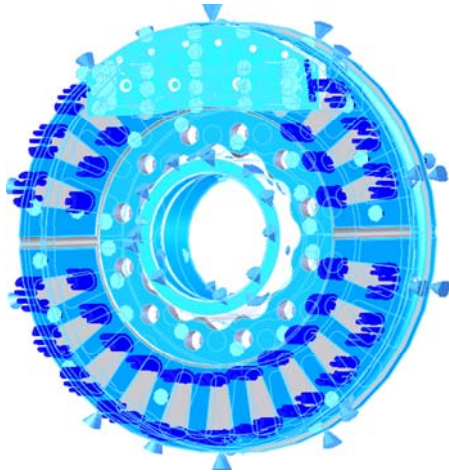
SiC_n/6061 brake disk section with thermal, force load, and fixing spot
